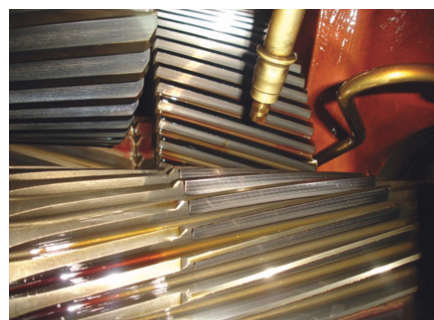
Wind turbine gearboxes, Demands on the gear oils
